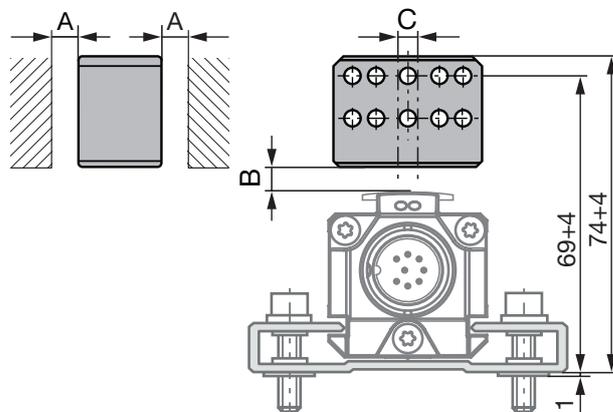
Dimensions and distances with BTL6-A-3800-2 magnet
